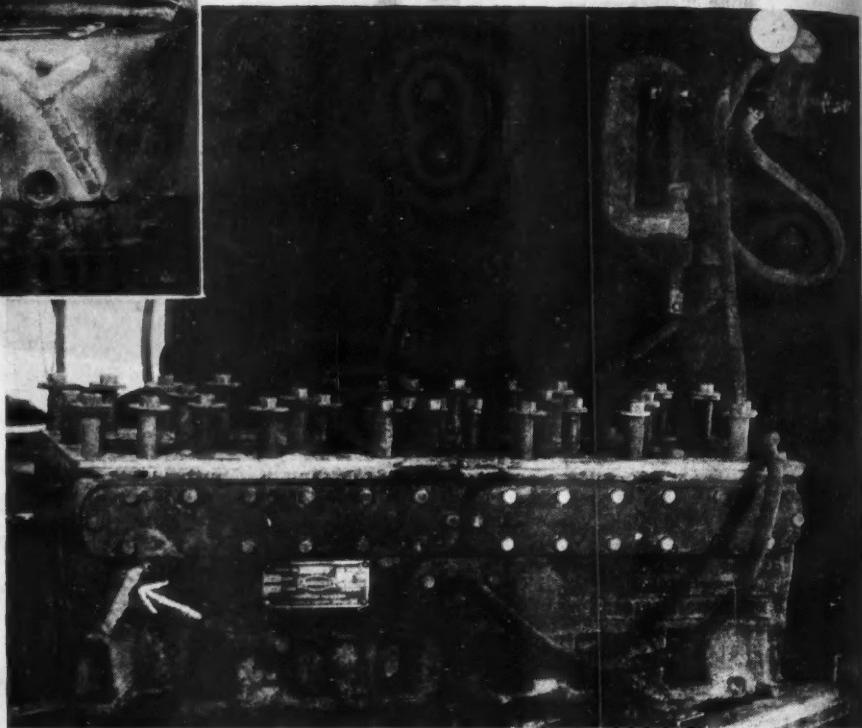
A typical setup for testing engine blocks. Cap screws are used to hold the gasket and dummy plate for testing. Innertube sections or cotton-rubber fabric is used for gaskets. Only the water openings are covered so that inspection is easier
